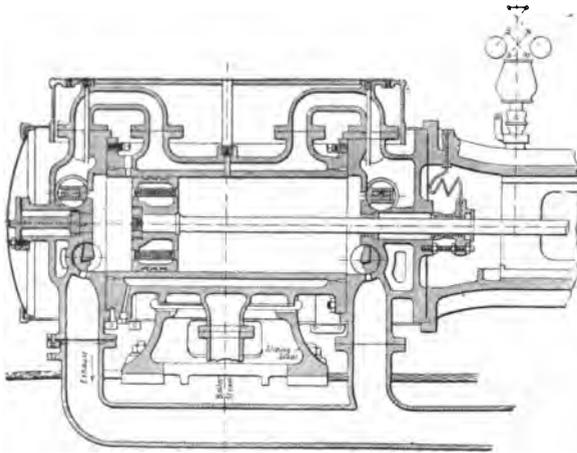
SECTION OF "FARCOT" ENGINE CYLINDER.
